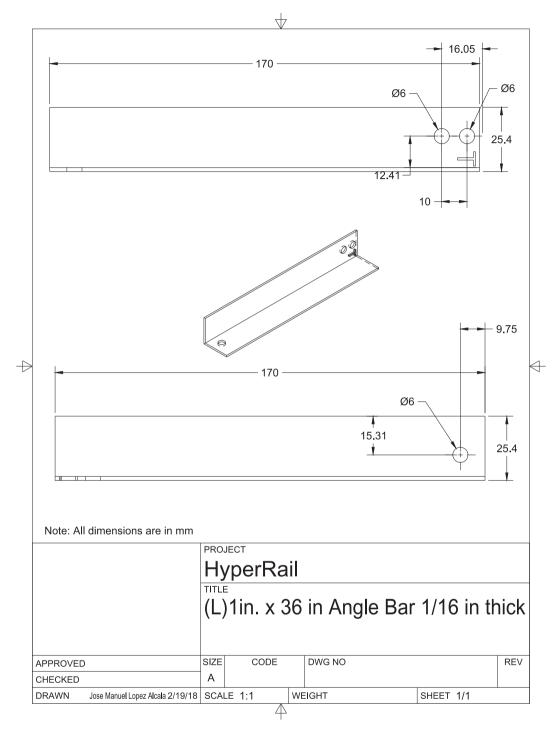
2D drawing of left aluminum angle bar. This will be directly attached to the aluminum C channel section.
